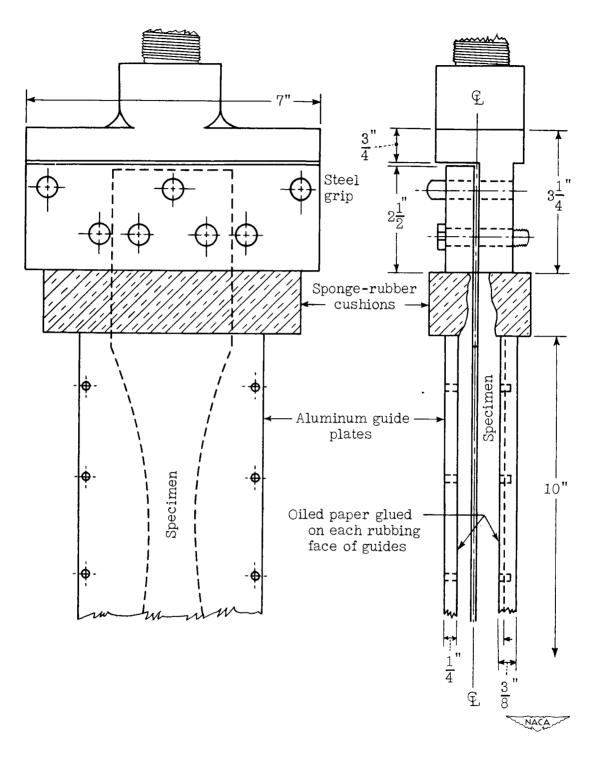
Close-up view of rigid grips and guide plates in testing position. Front support removed to show details.
